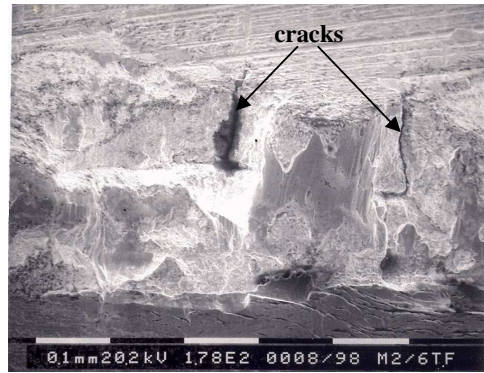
Severe chipping and thermal cracks on Tool B after 5 minutes of face milling Ti-6246 at 80 m/min
